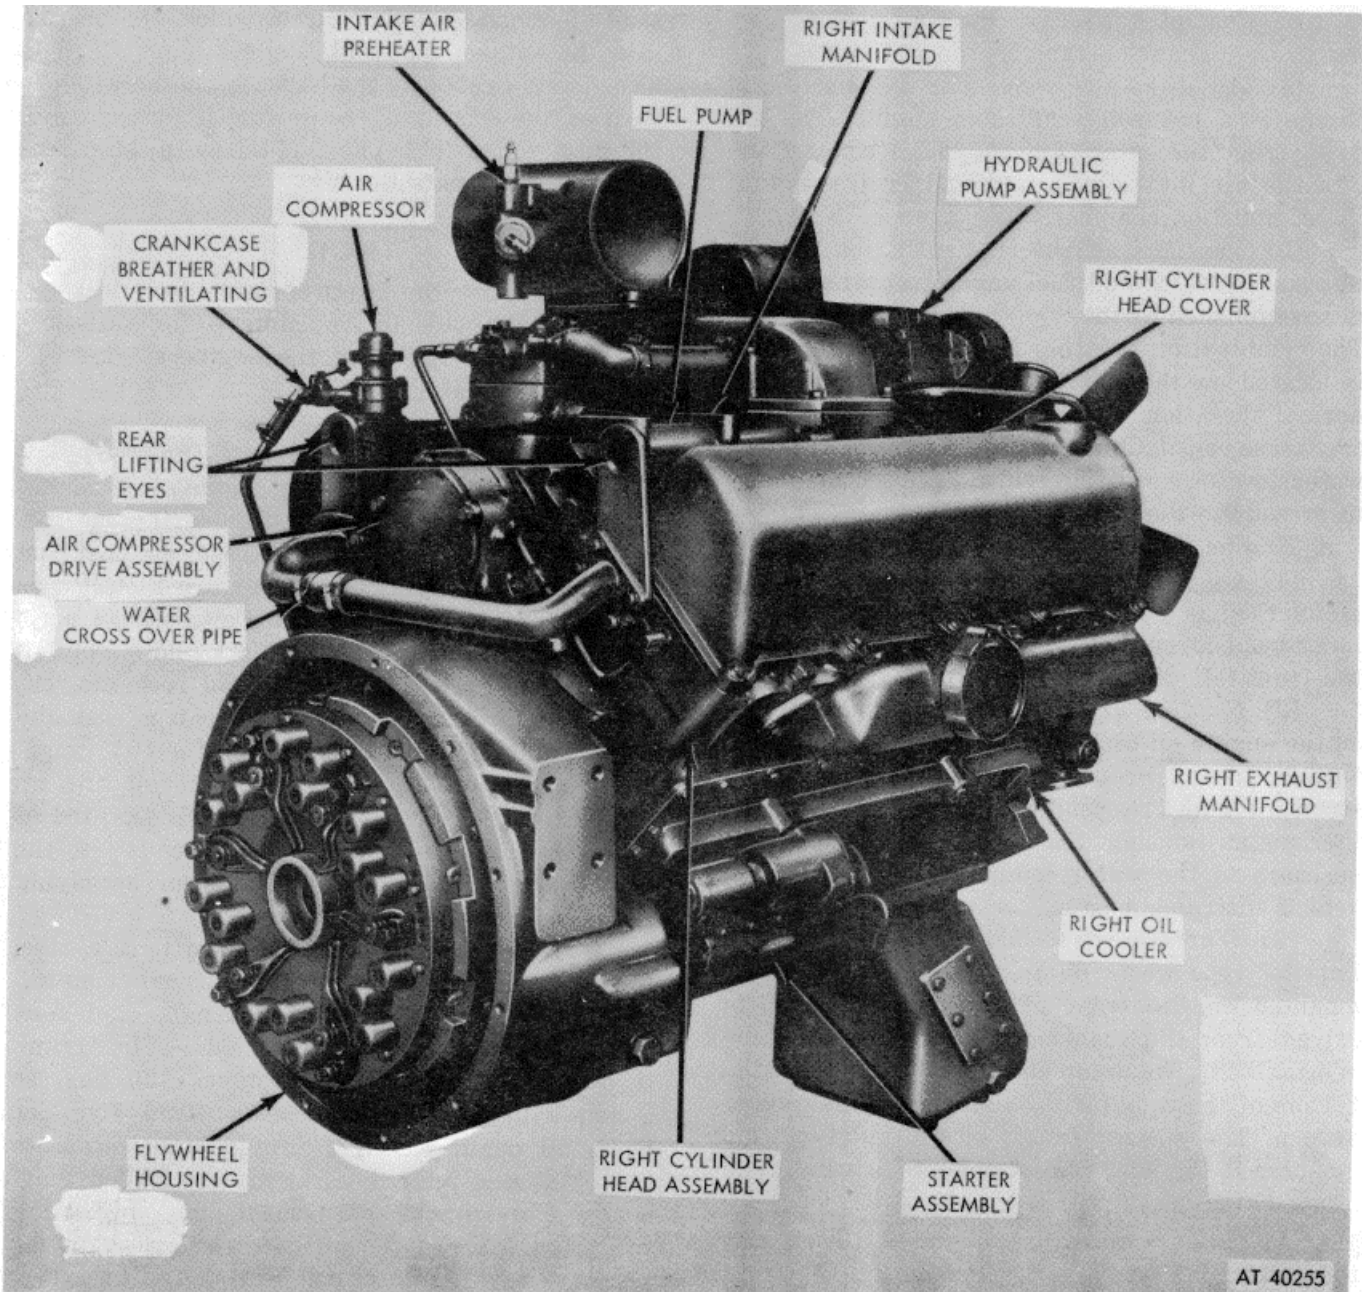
Model V8-300 engine assembly--3/4 right rear view.
